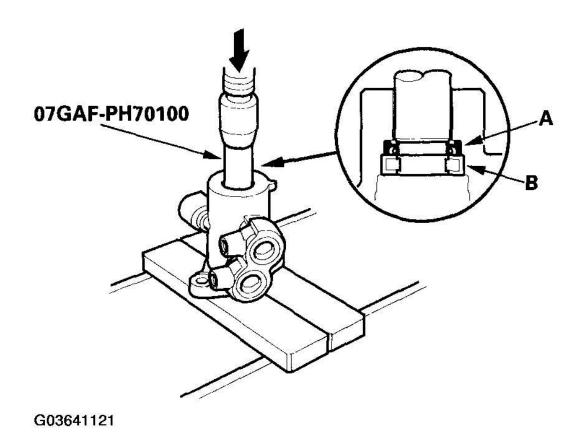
Pressing Valve Oil Seal And Roller Bearing Courtesy of AMERICAN HONDA MOTOR CO., INC.
